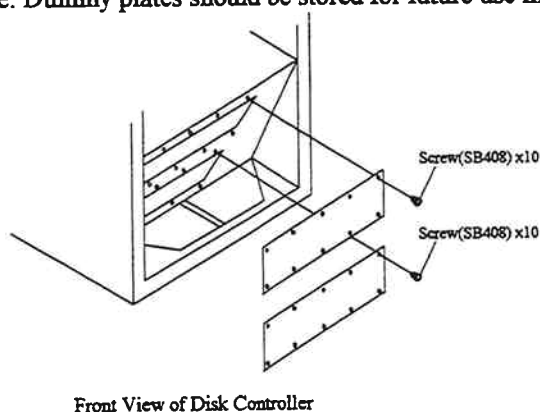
Removal of Dummy Plate
